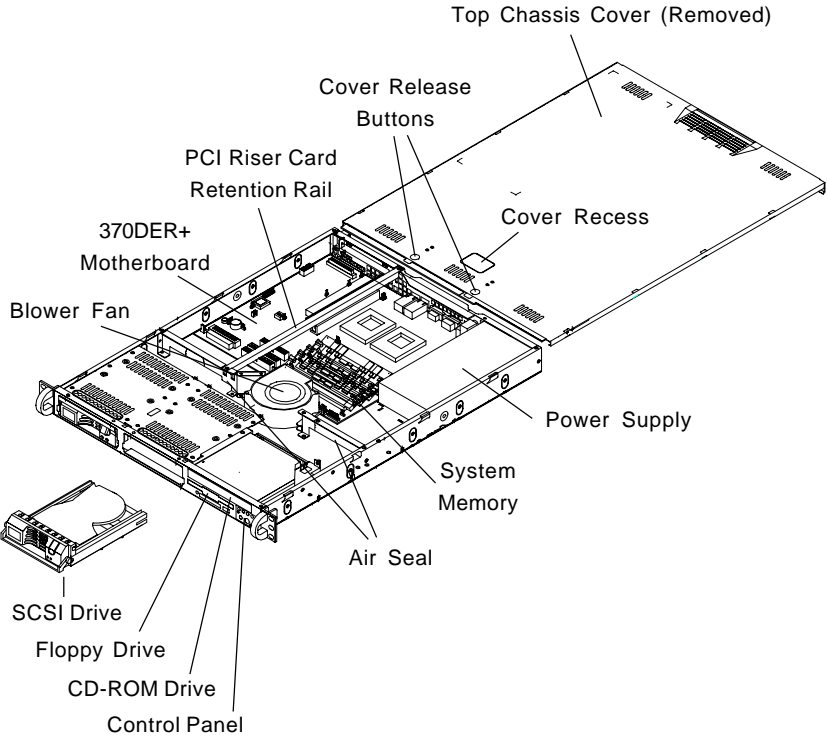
Accessing the Inside of the SuperServer 6010H (with one SCSI Drive removed)
